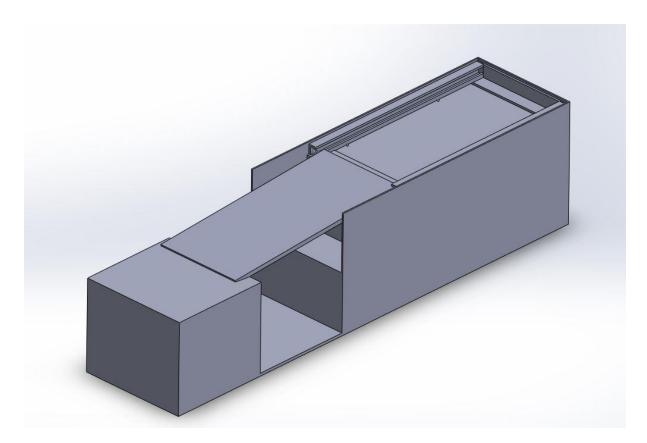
Ramp-Channel Assembly Installed on Stairs and Pedestrian 3D
